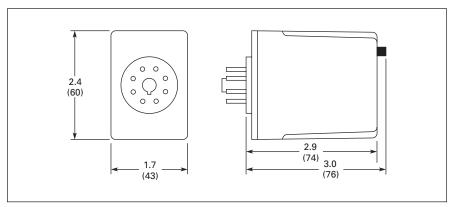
D65VMC Series — Approximate Dimensions in Inches (mm)
